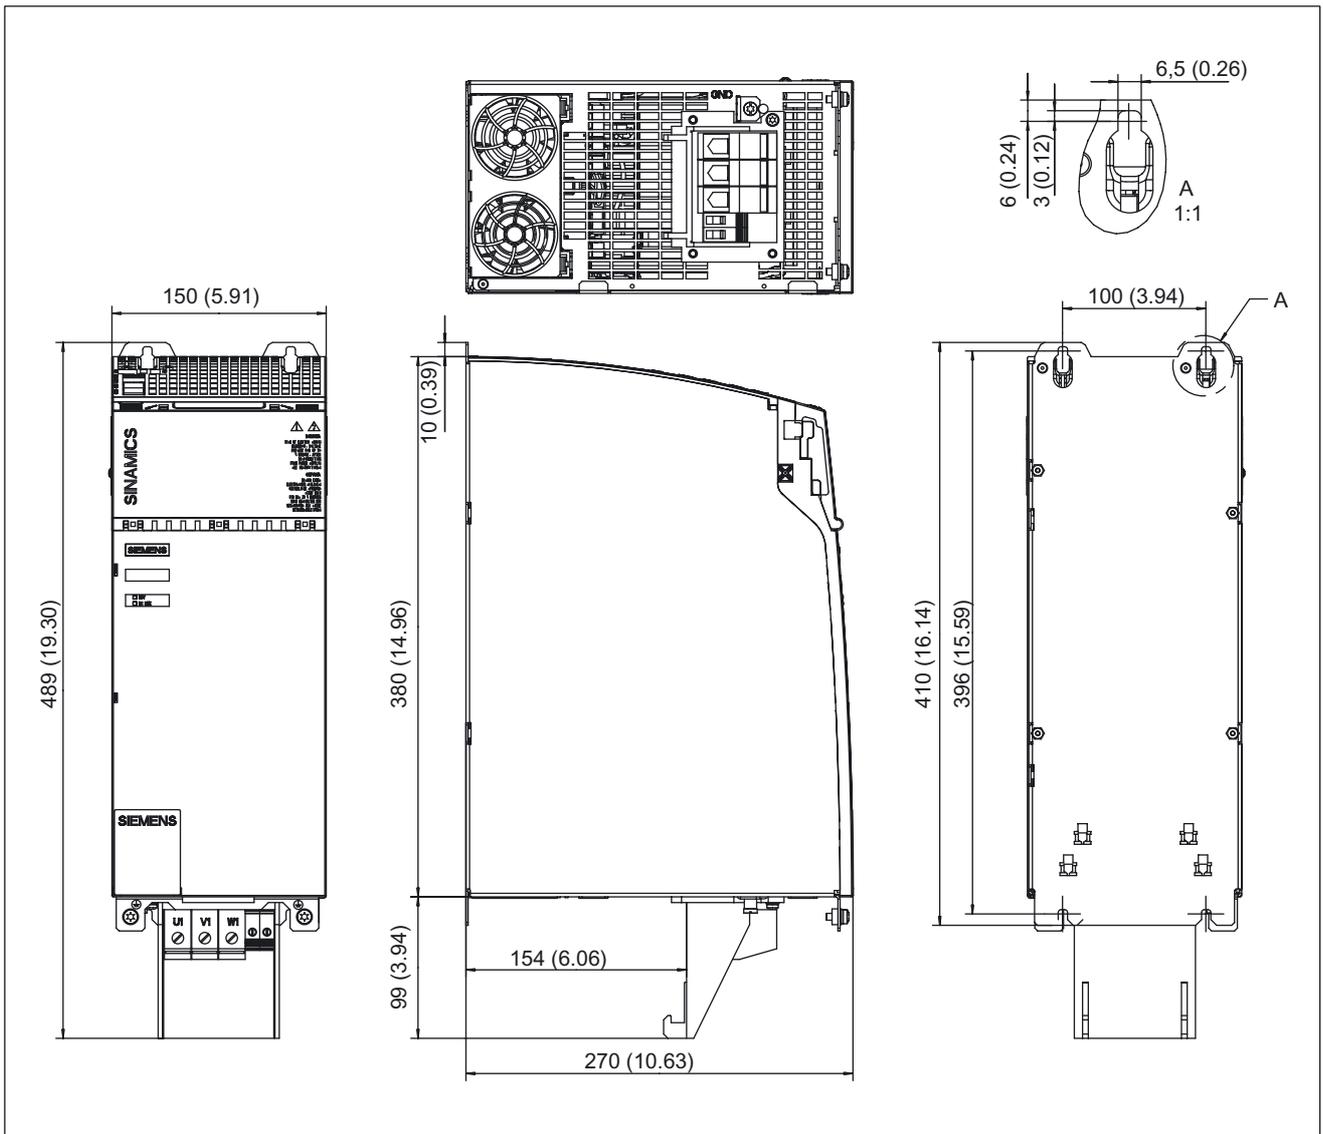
Dimension drawing of Basic Line Module 40 kW with internal air cooling, all dimensions in mm and (inches)
